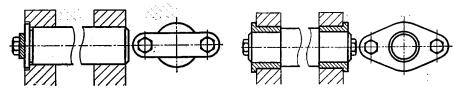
Pivot pin fixed against axial displacement by its shoulder and end plate
